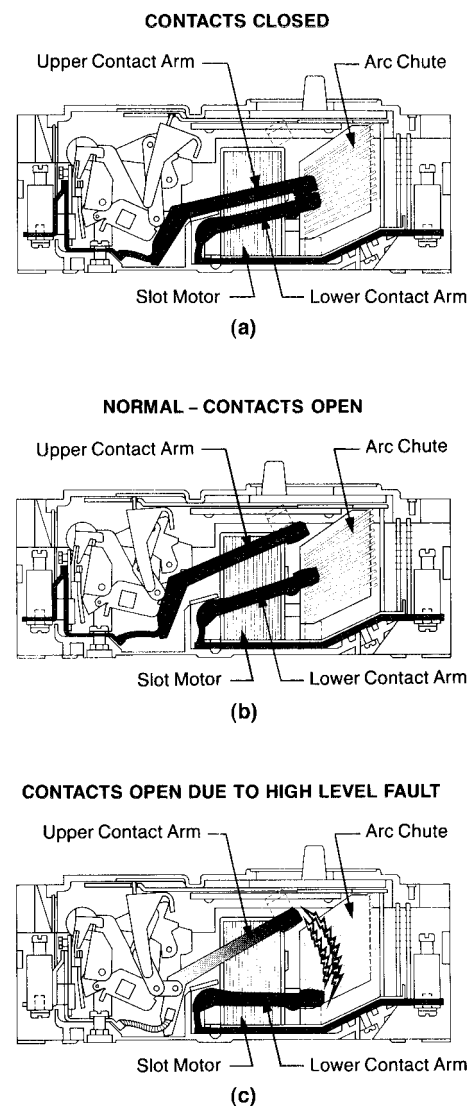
A cutaway drawing of a molded-case current-limiting circuit breaker. This figure shows three different positions of the contacts during the opening operation. (a) Contacts are in the closed position. (b) Contacts are in the fully open position. (c) The lower contact is in the fully open position, giving the maximum contact separation.
